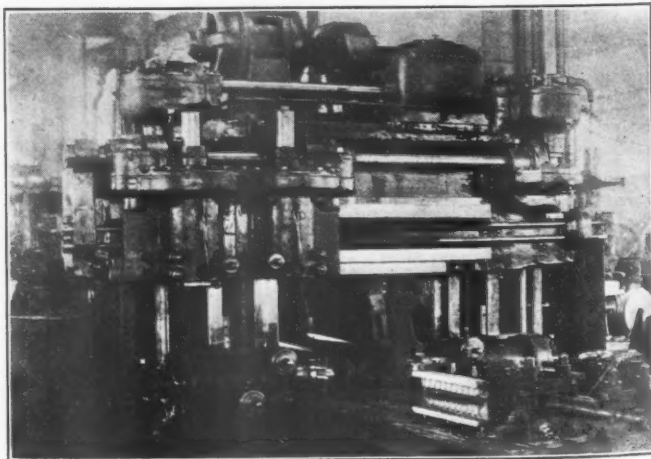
Milling the guide bar fit on a herringbone type of crosshead
